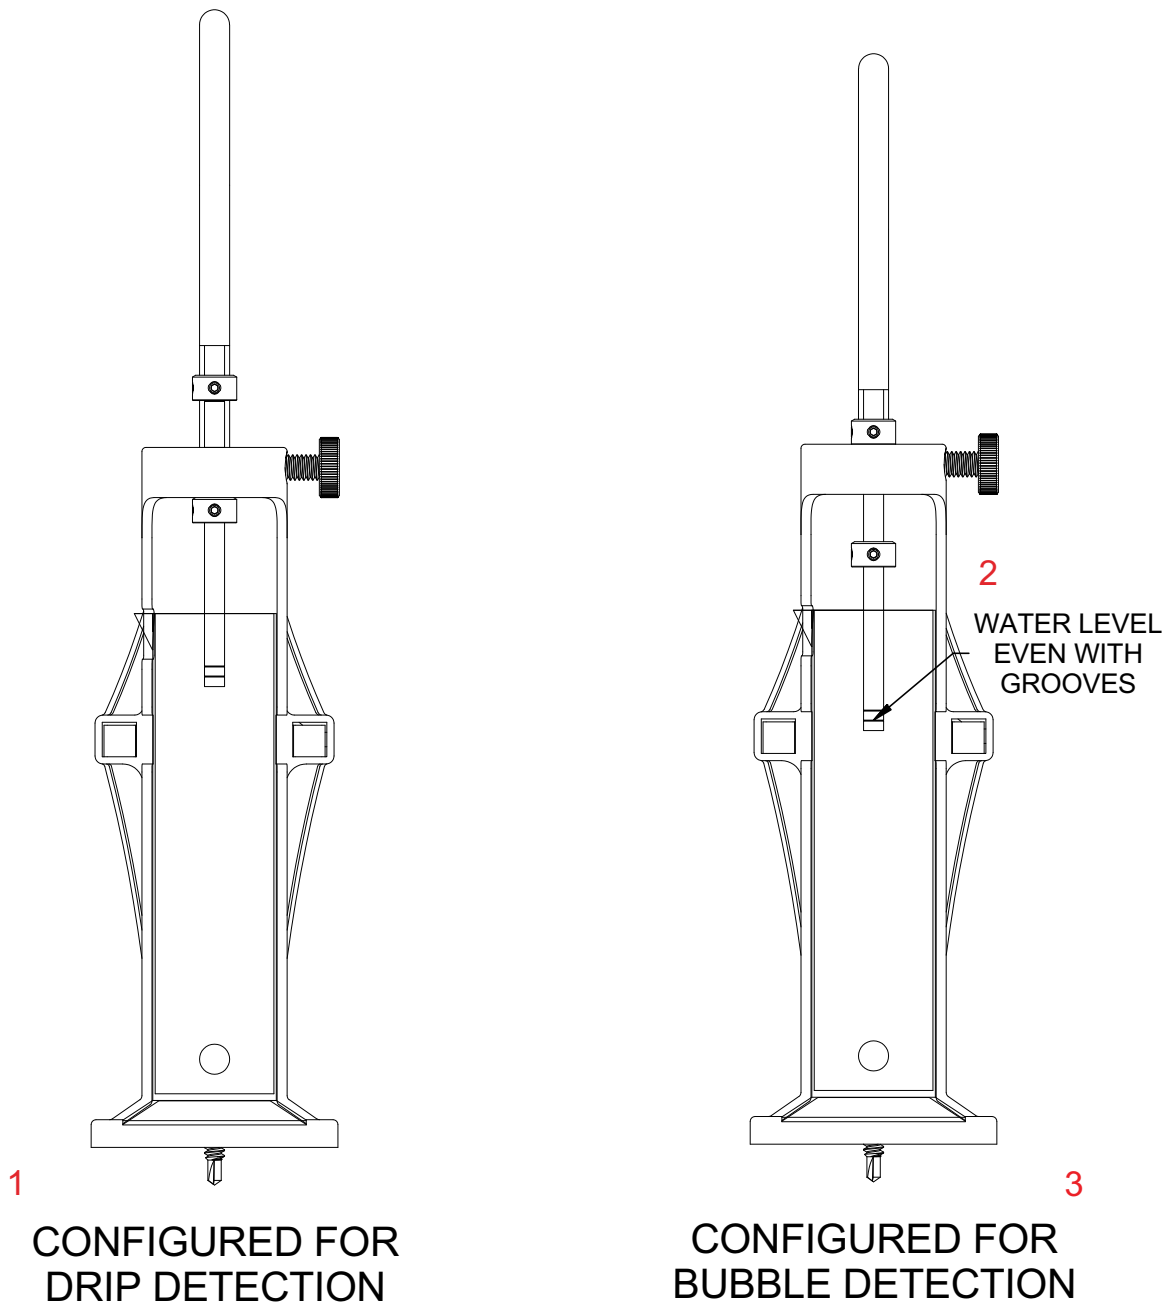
DIGITAL LEAKAGE MEASUREMENT SENSOR ASSEMBLY (P/N 98873)
